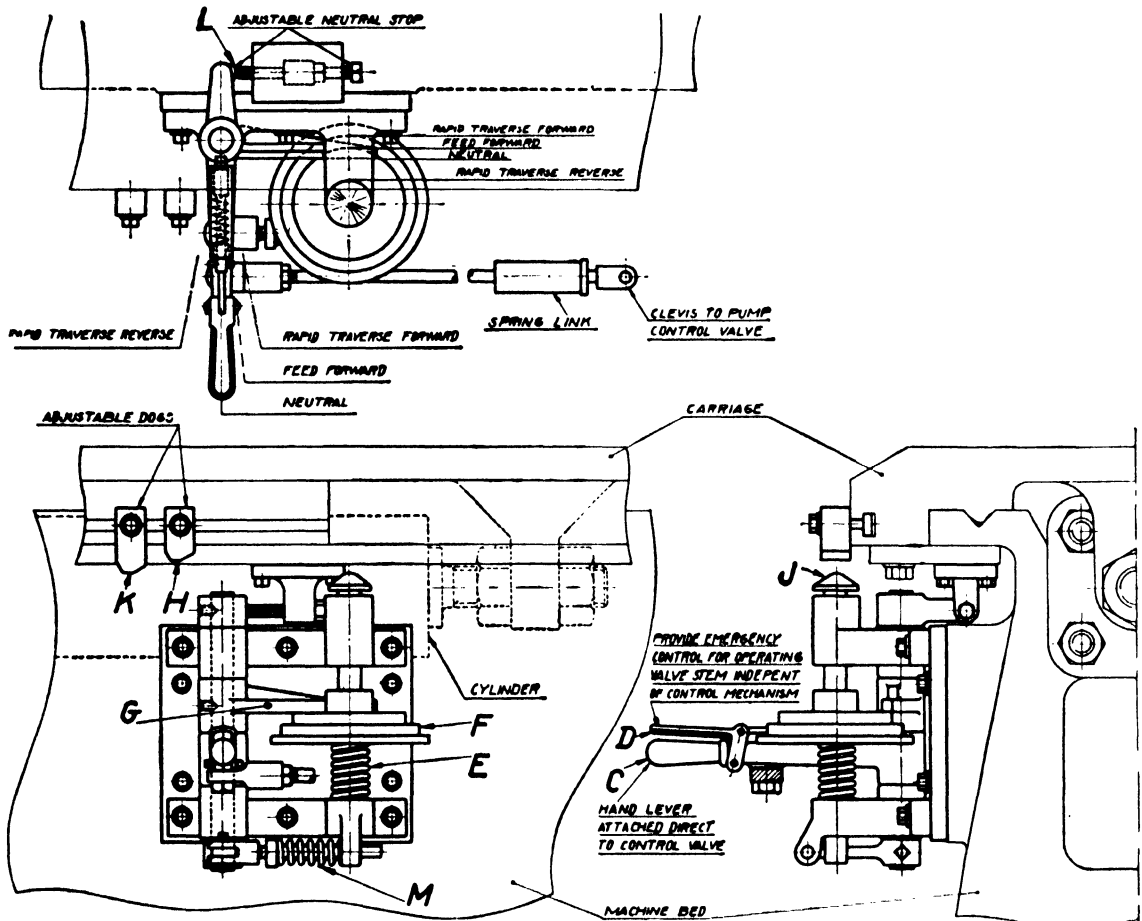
Suggested control mechanism for fluid power feed. (The Oilgear Co., Milwaukee, Wis.)
